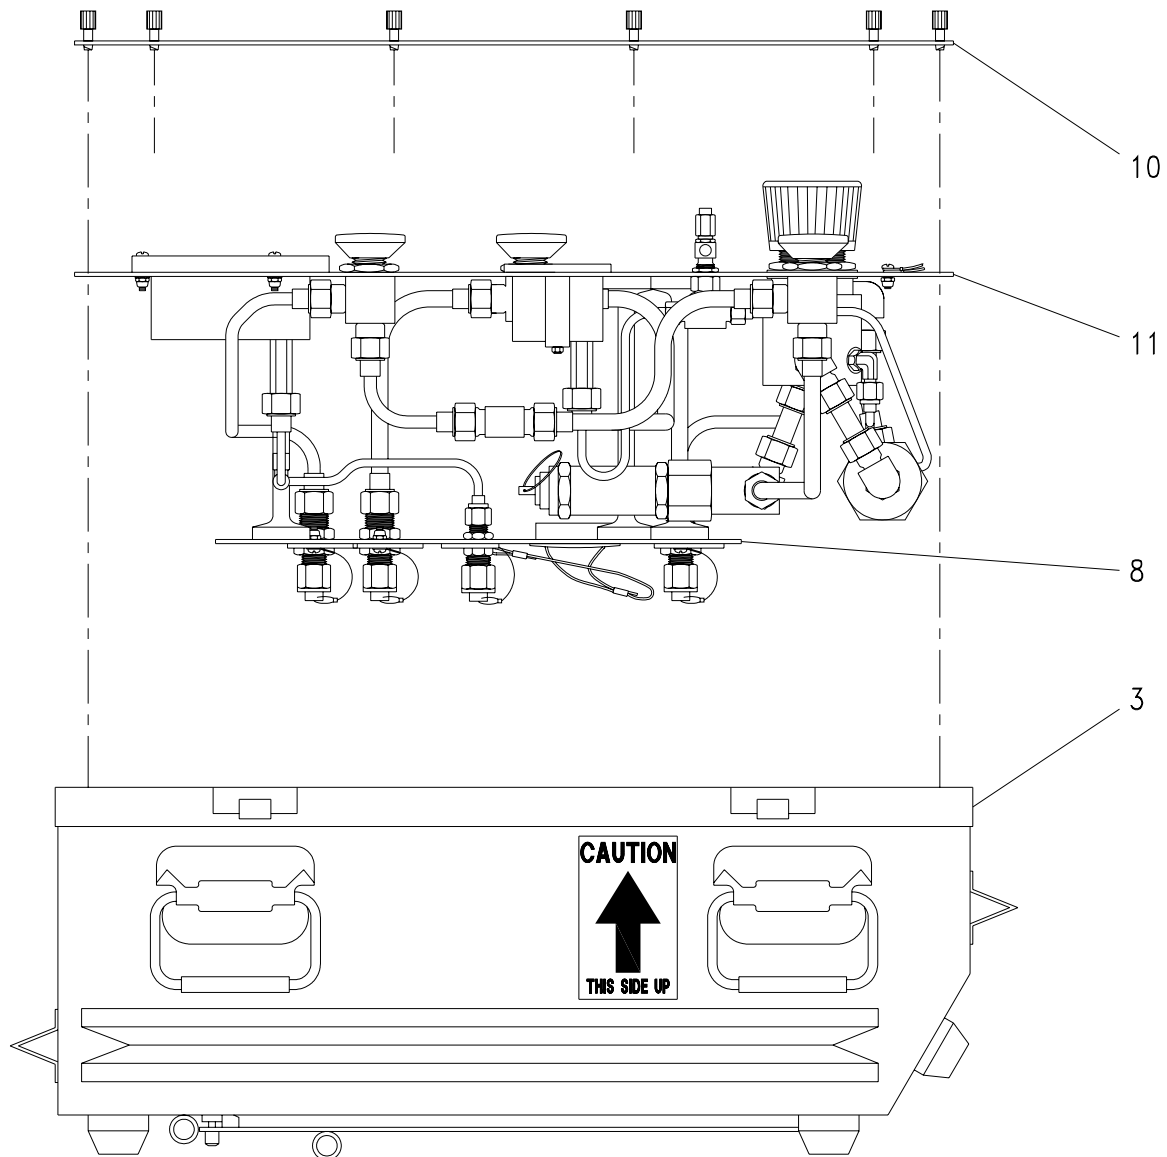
Removing/Reinstalling Control Console Panel Assembly (Sheet 3 of 3)
